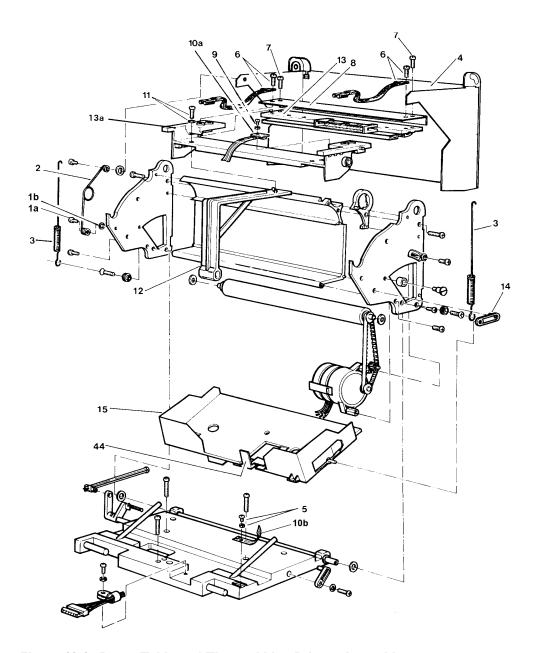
Paper Table and Thermal Line Printer Assembly
